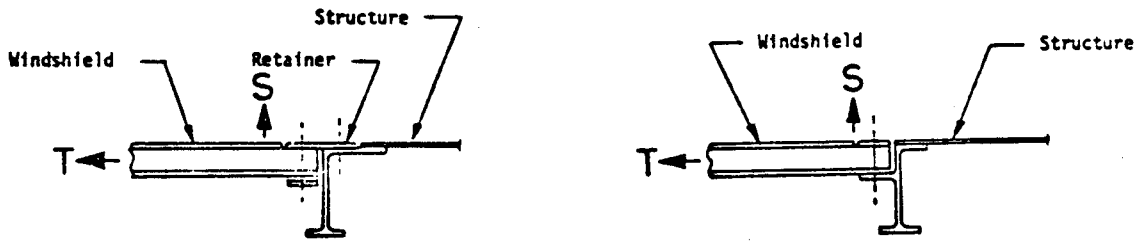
Transparency Installation with Single Row of Loose Fitting Fasteners
